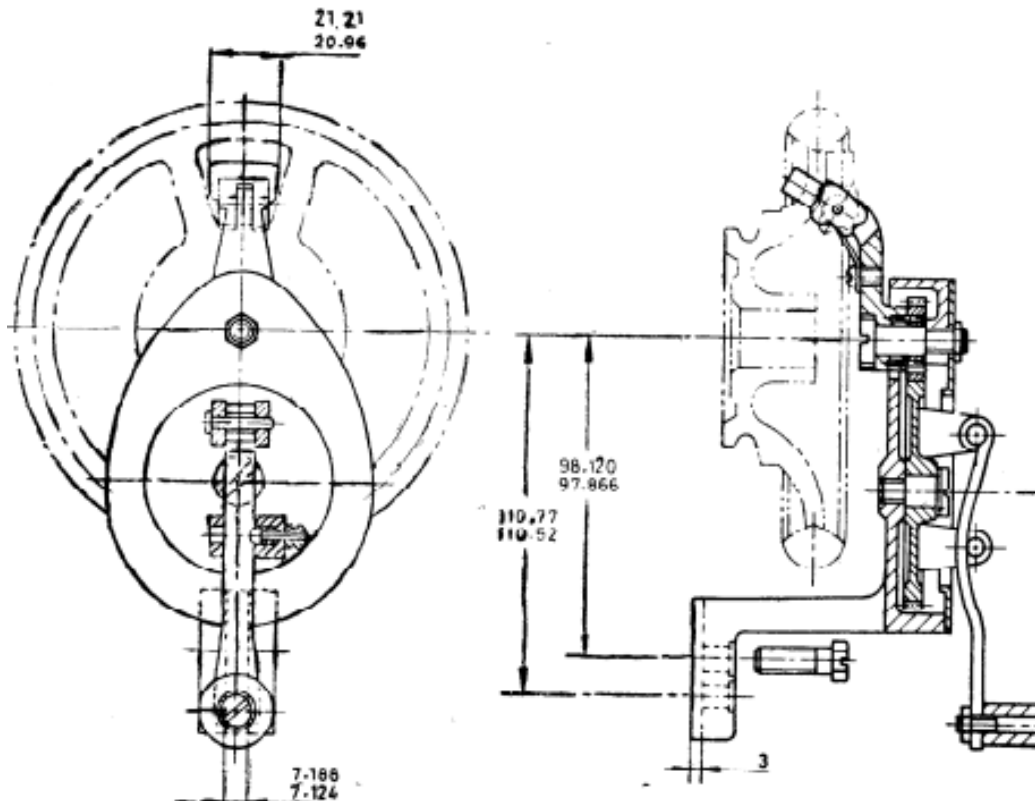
DIMENSION FOR HAND ATTACHMENT ASSEMBLY
